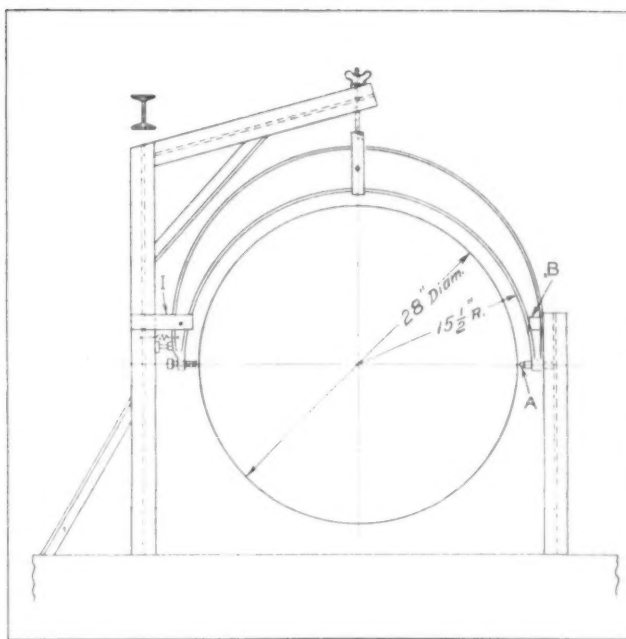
Micrometer Mounted on Lathe Carriage for Measuring Large Work
